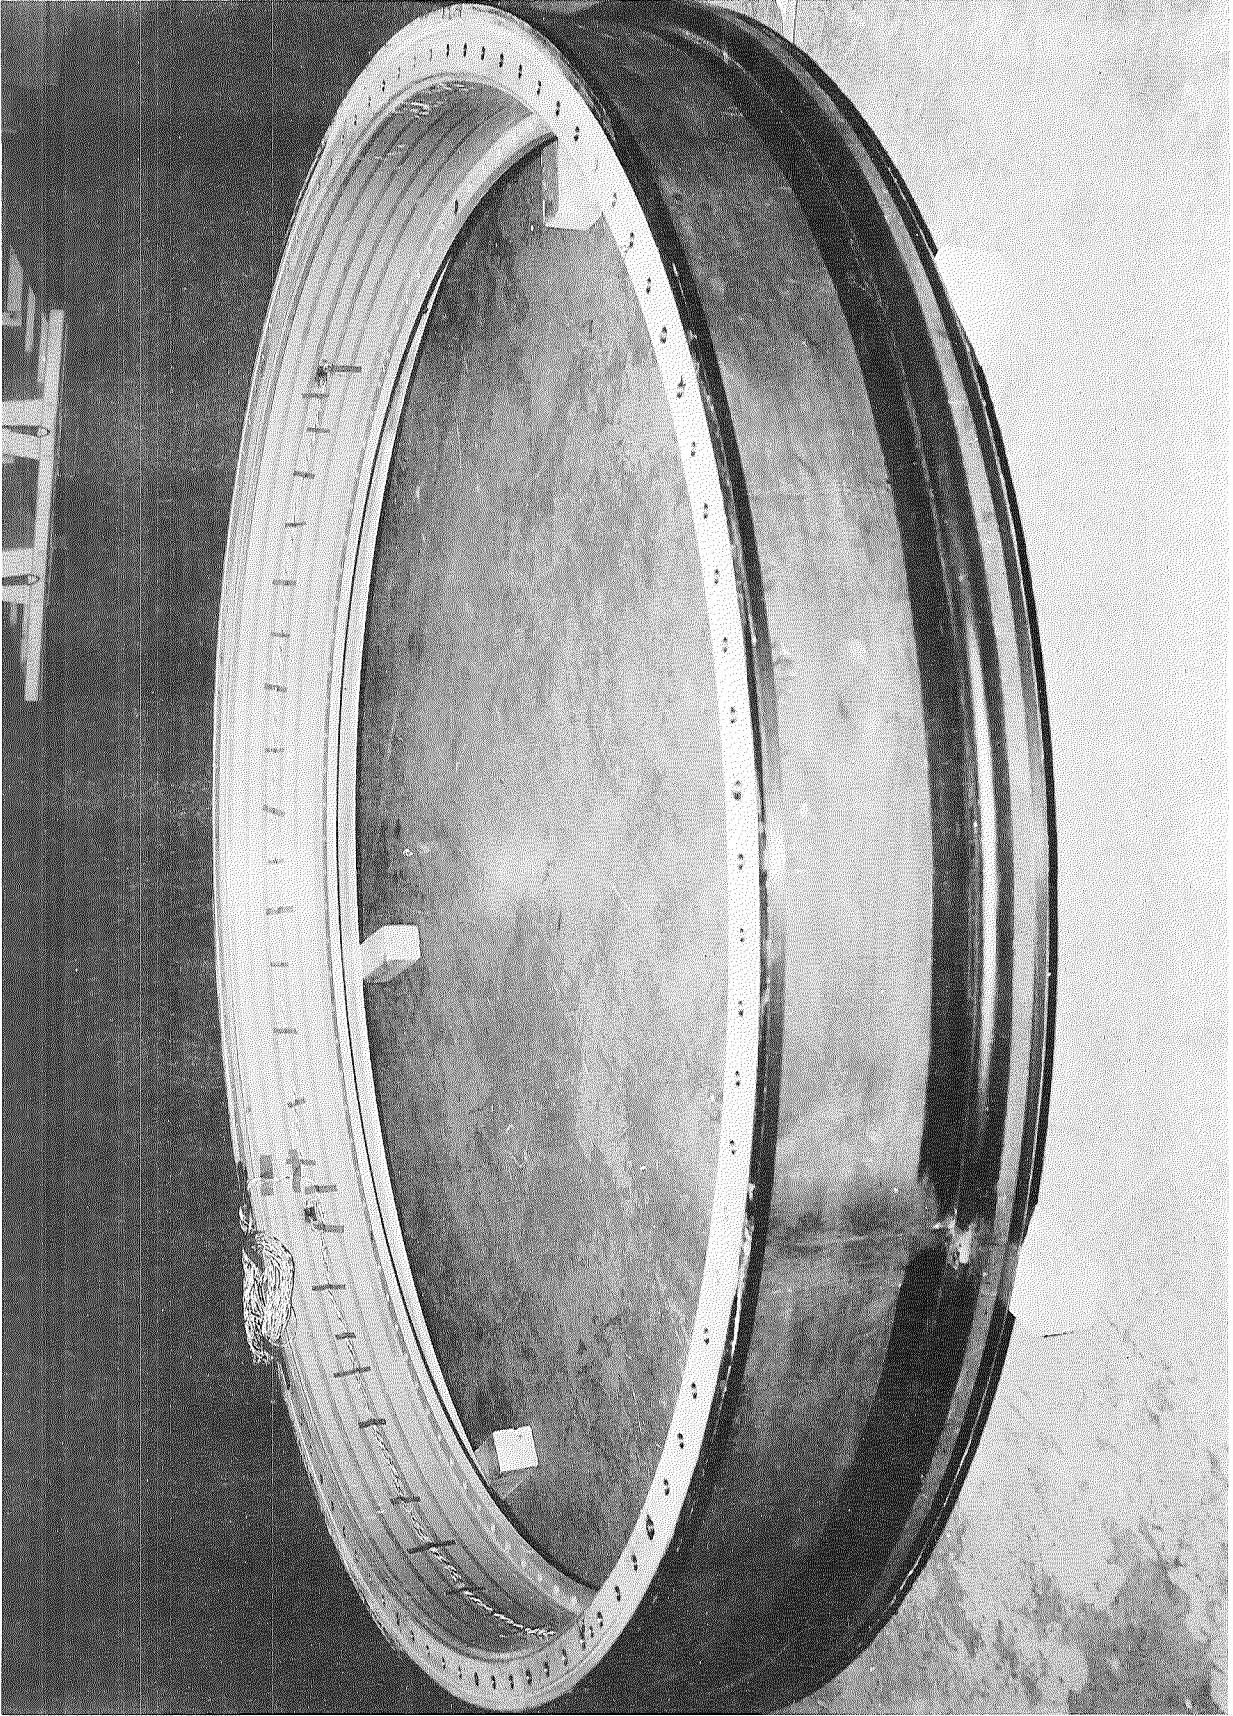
Flexible Seal for 260-In.-Dia Motor
